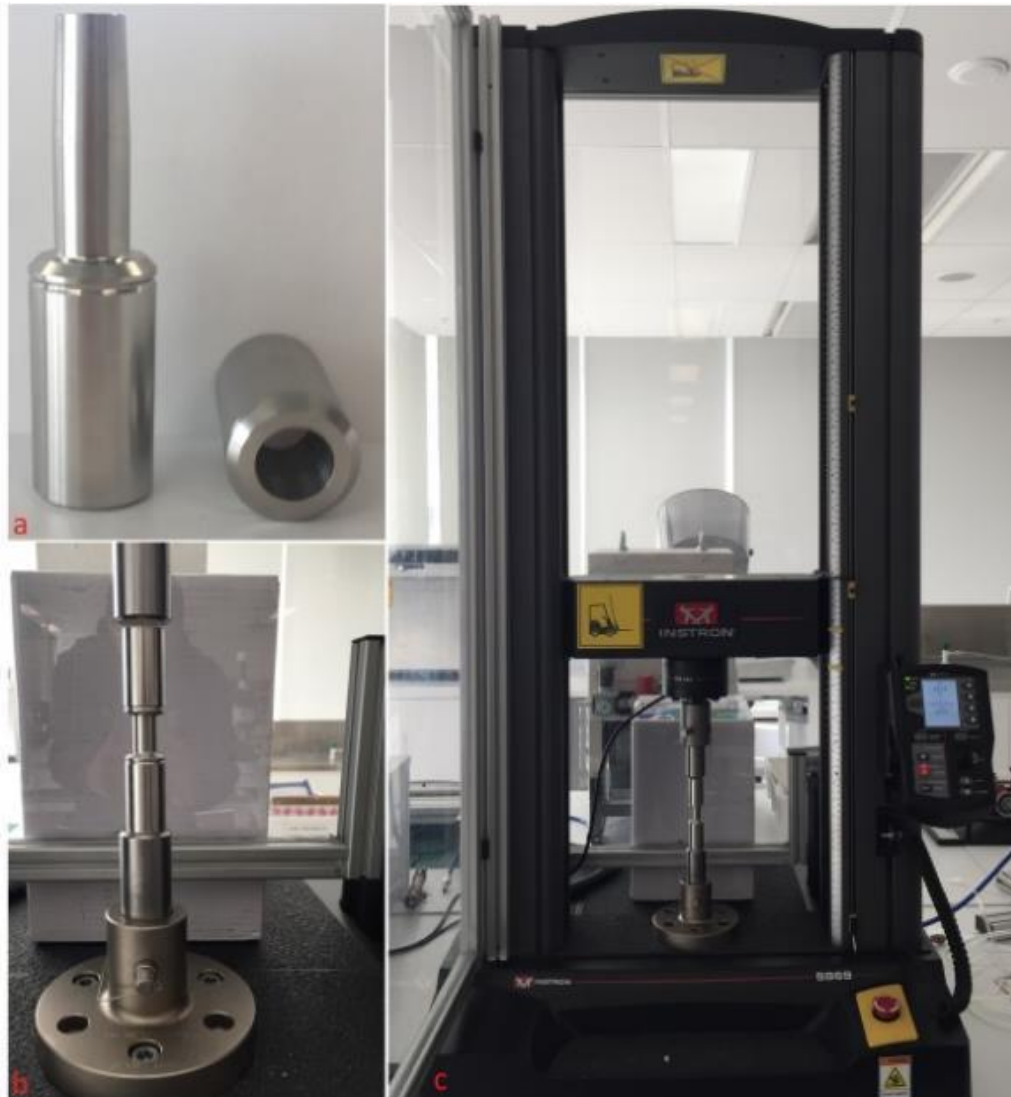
a) Geometry of the head-neck sample before assembly b) Assembly arrangement of the head-neck geometry for axial compressive ramp load up to 4000N to simulate impacting the head onto the stem with hammer c) Instron 5969 Dual Column Testing Systems used for assembly
